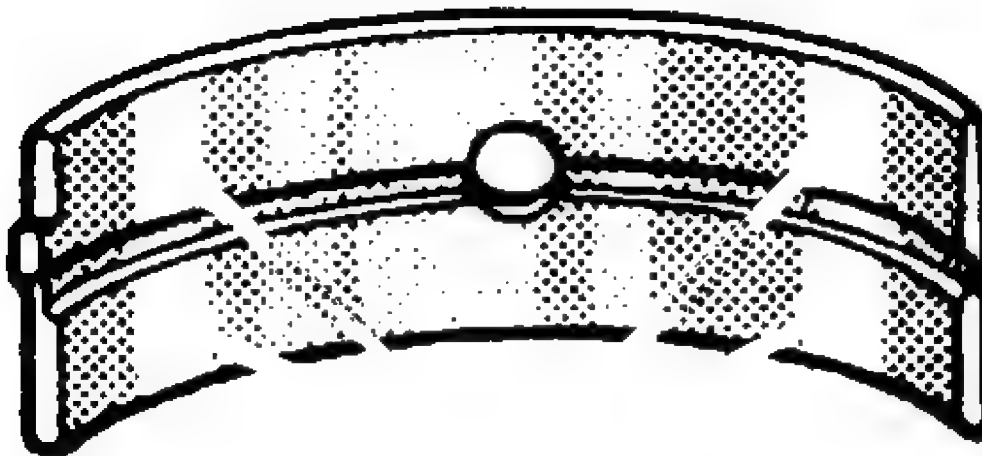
Crankshaft Bearing Polished Sections (Improper Seating)
